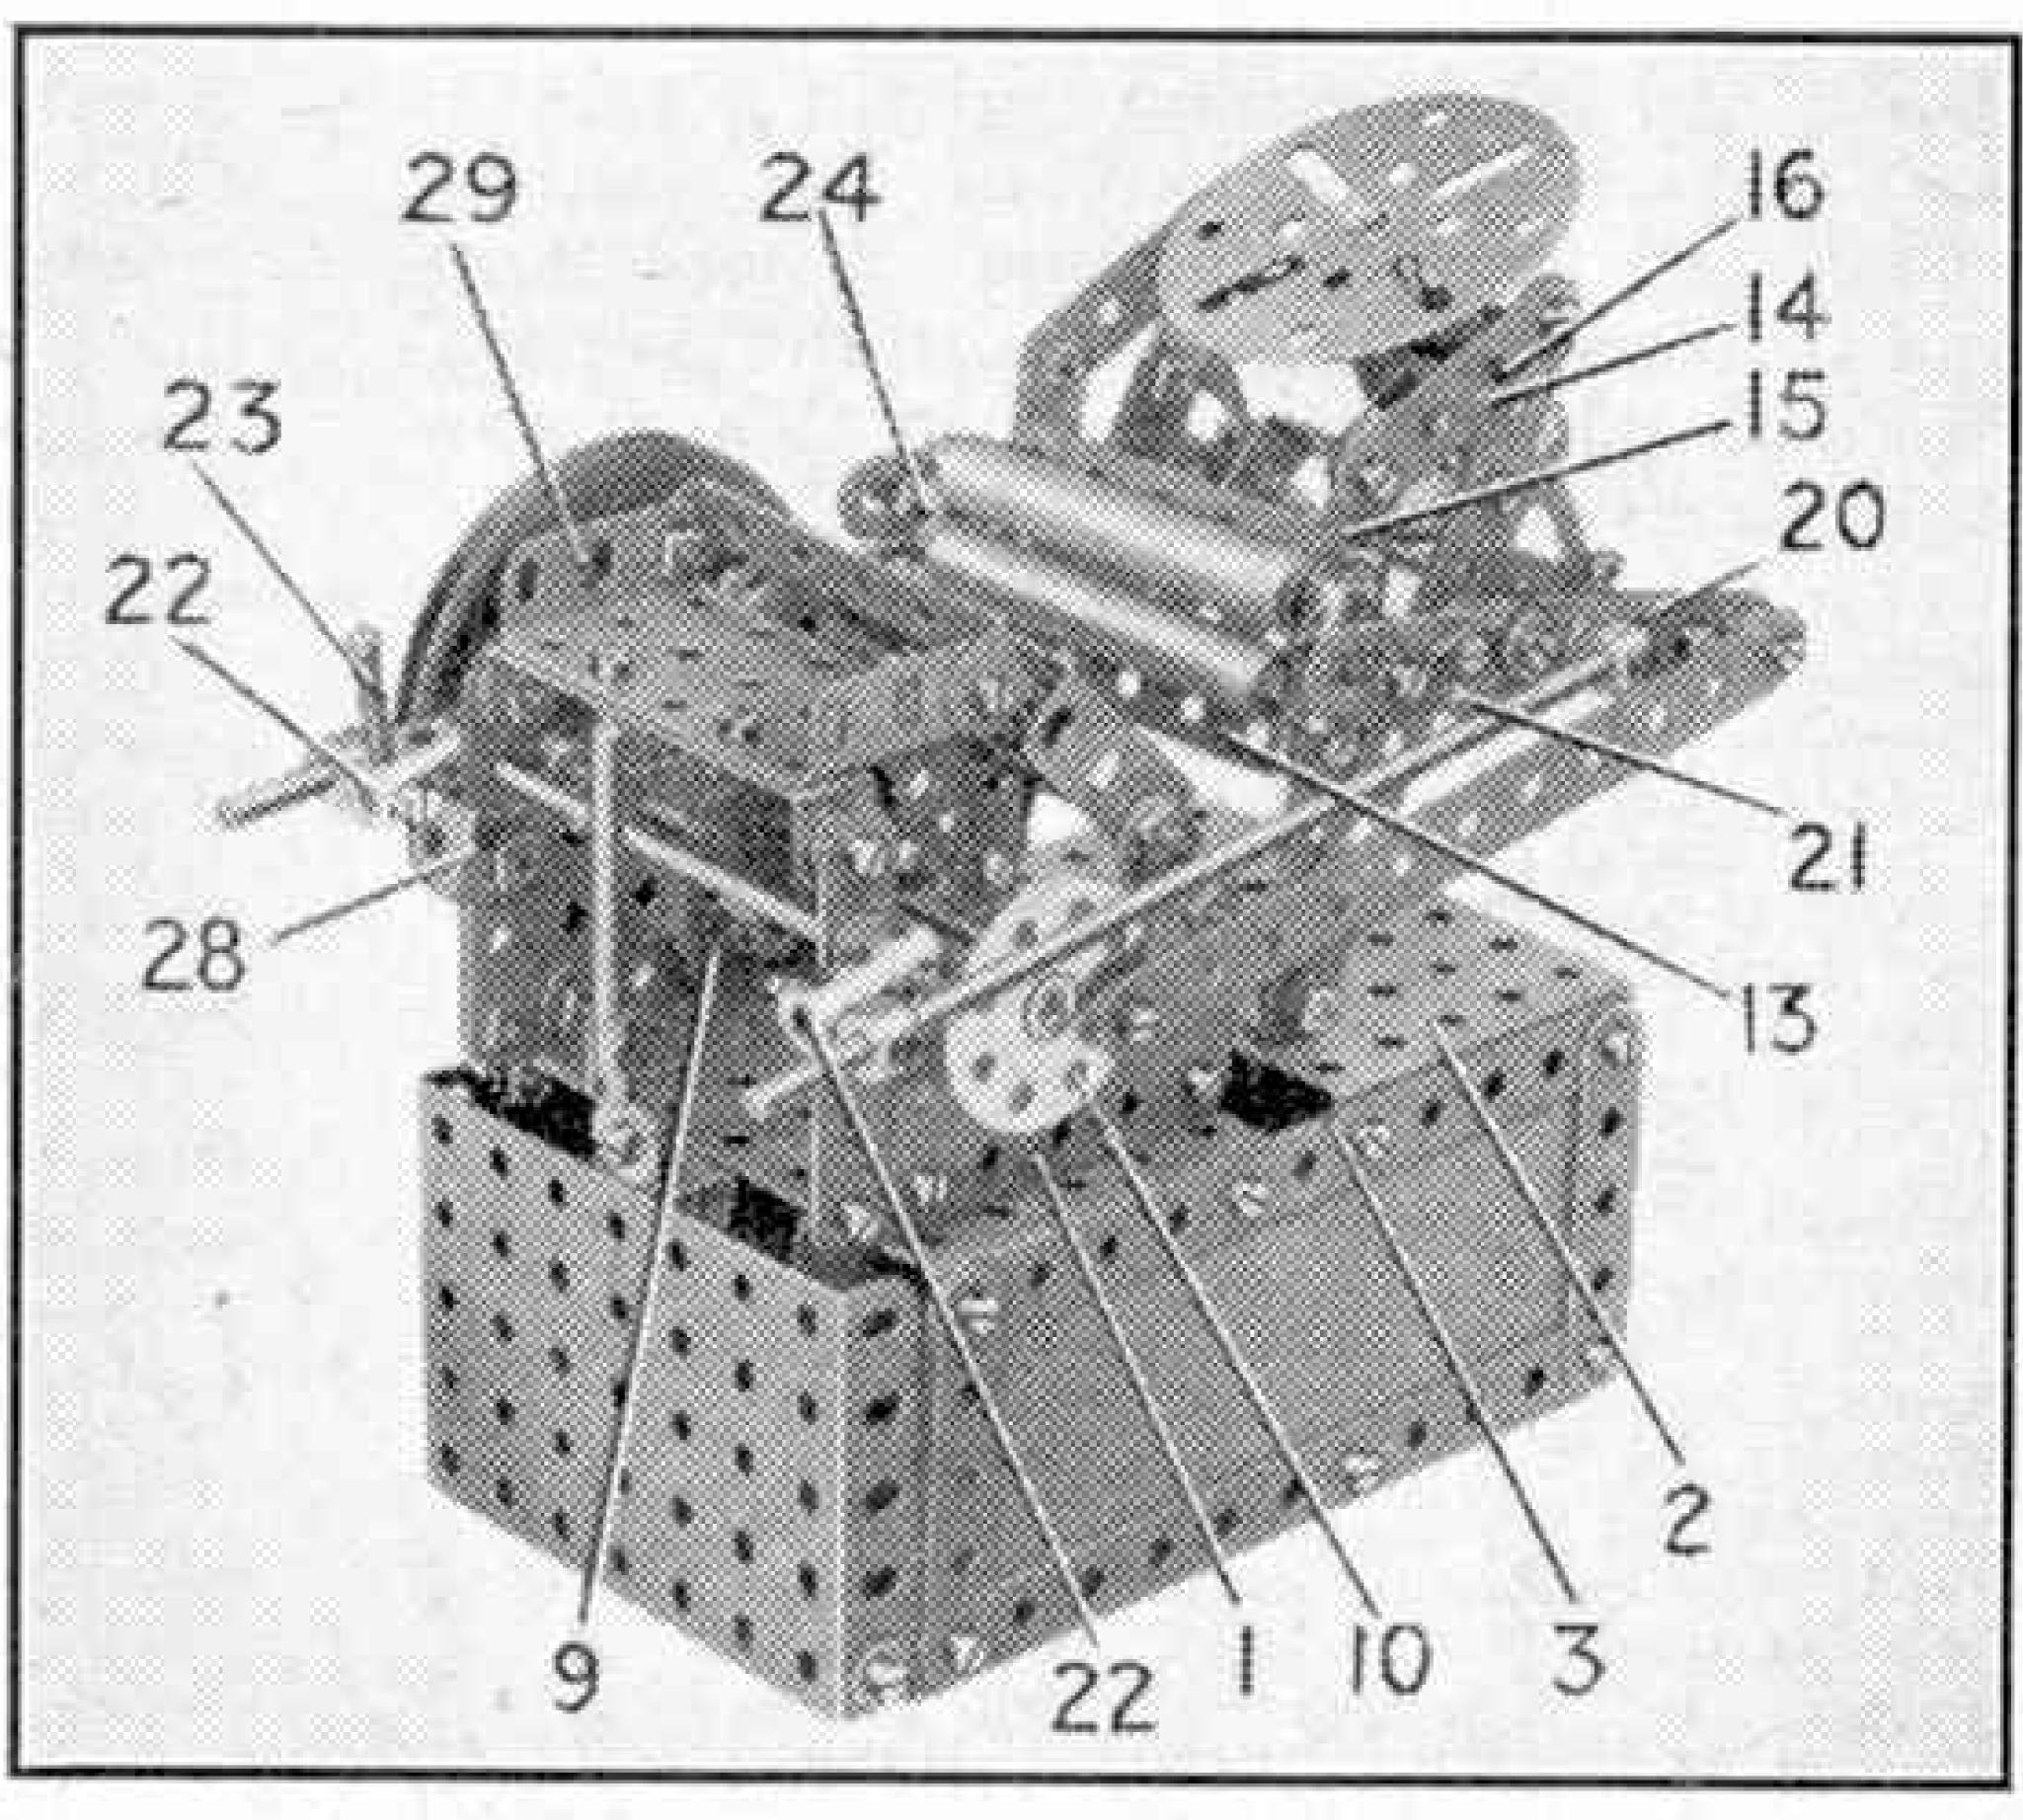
General view of the model printing machine, showing the crank mechanism that operates the rollers. The platen is seen open and the rollers are over the type bed.
